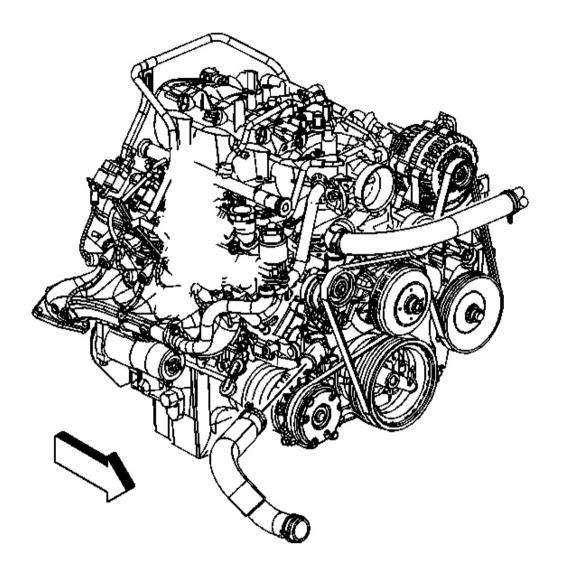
Outlet Hose & Water Pump (4.8, 5.3, & 6.0L) Courtesy of GENERAL MOTORS CORP.
